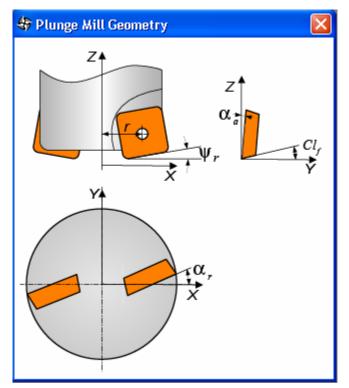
Machine & Tool/Tool Type tab in Plunge Milling module
